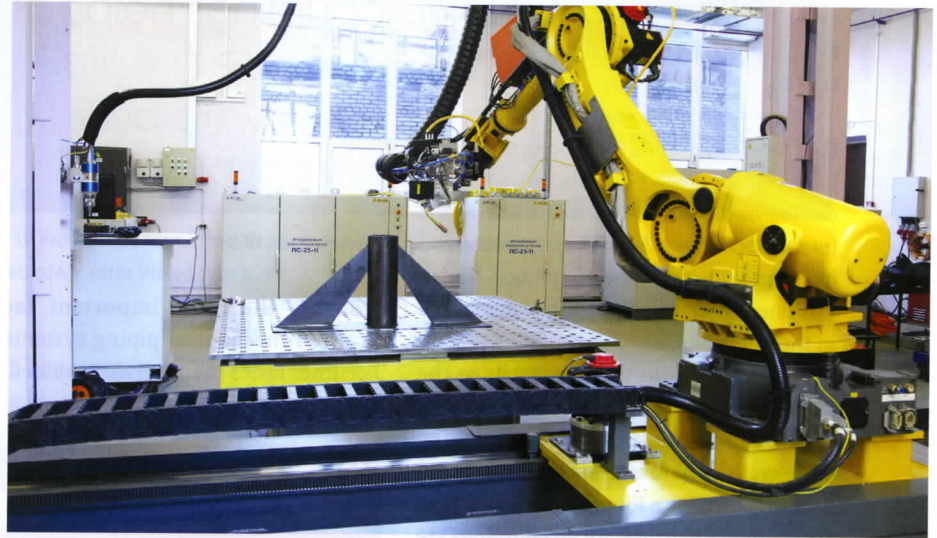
Robotized system for laser cutting and welding in various positions
